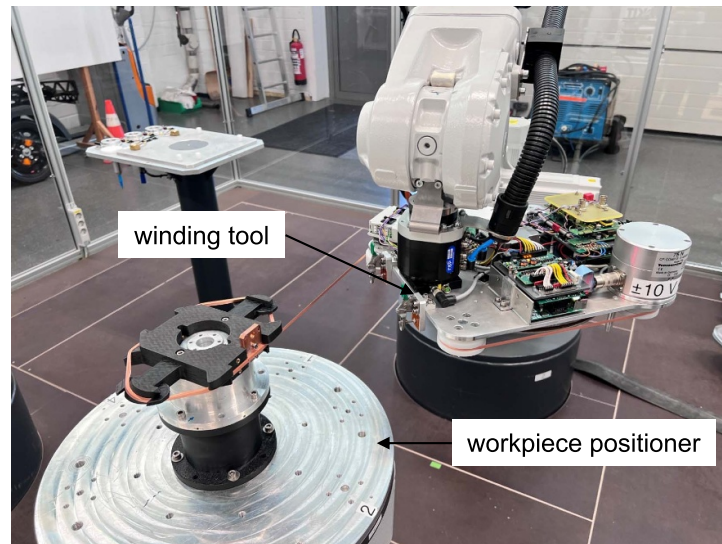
Robotic winding of the non-planar coil for distributed winding. The coil support structure is mounted on the workpiece positioner and rotates synchronously with it during the winding process.
